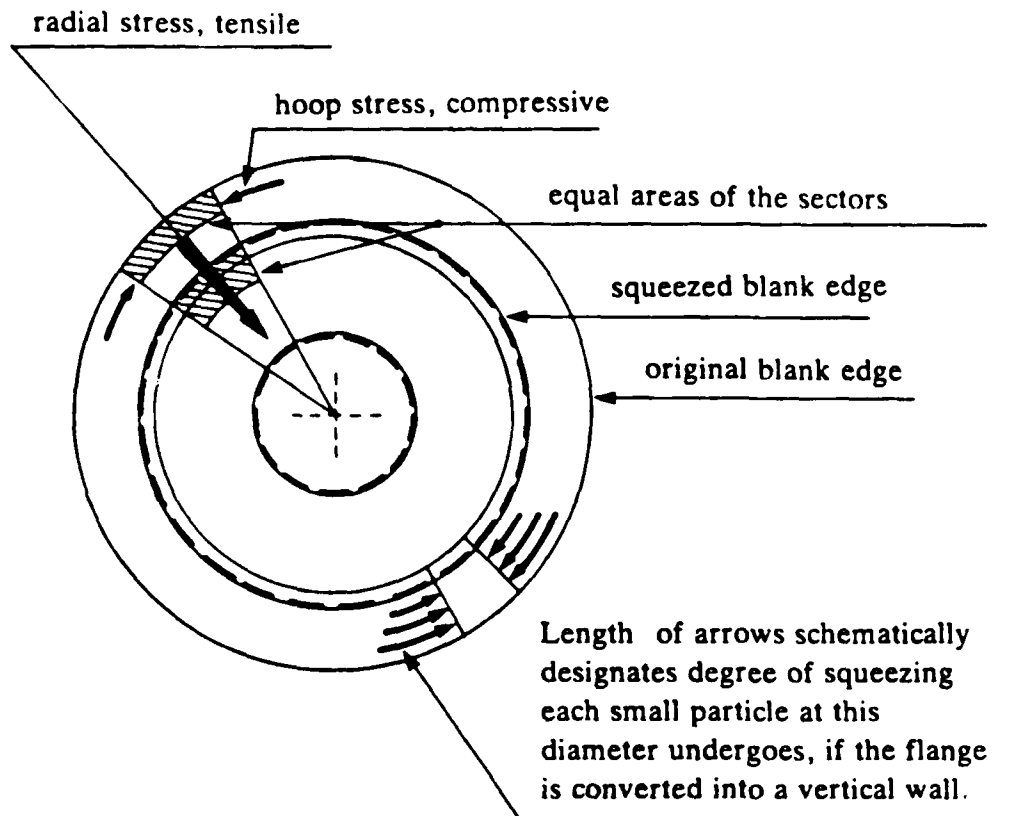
Schematic squeezing in pure radial drawing of a ring
